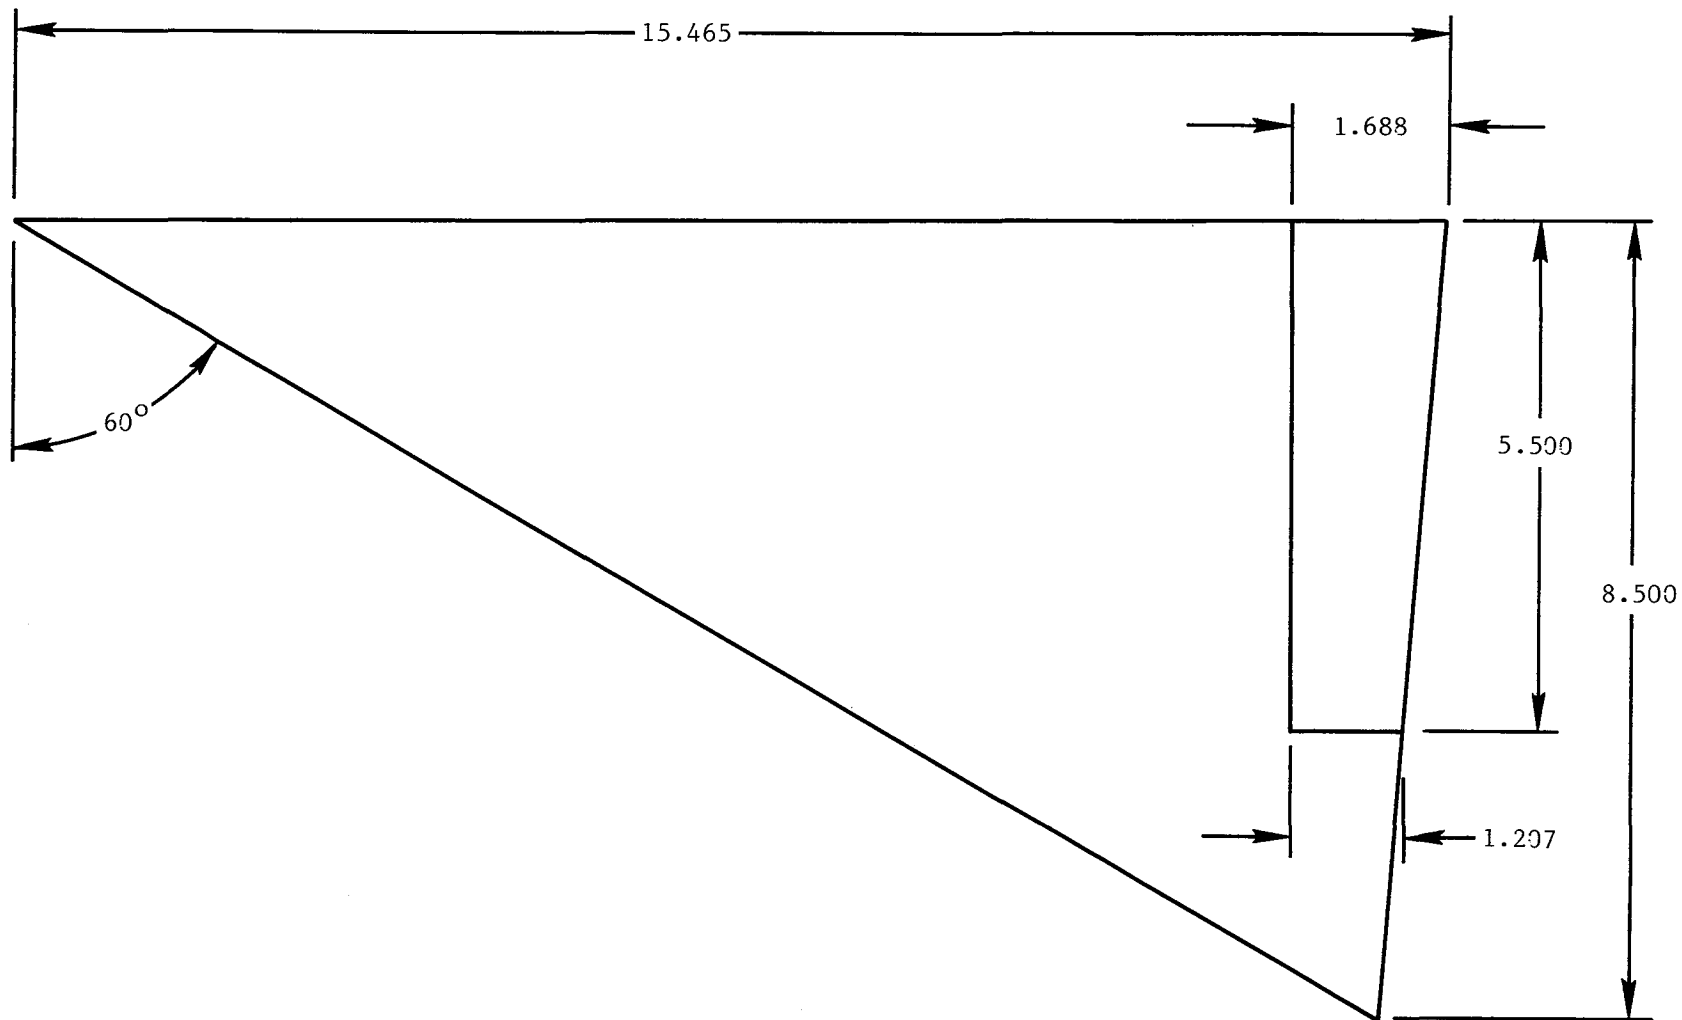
Details of 60° delta wing. Linear dimensions in inches.
